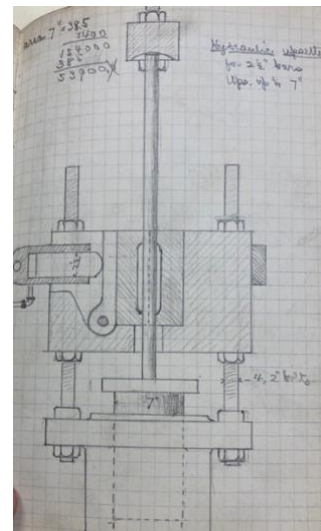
Hydraulic Equipment (Goddard, 1902-1907)
